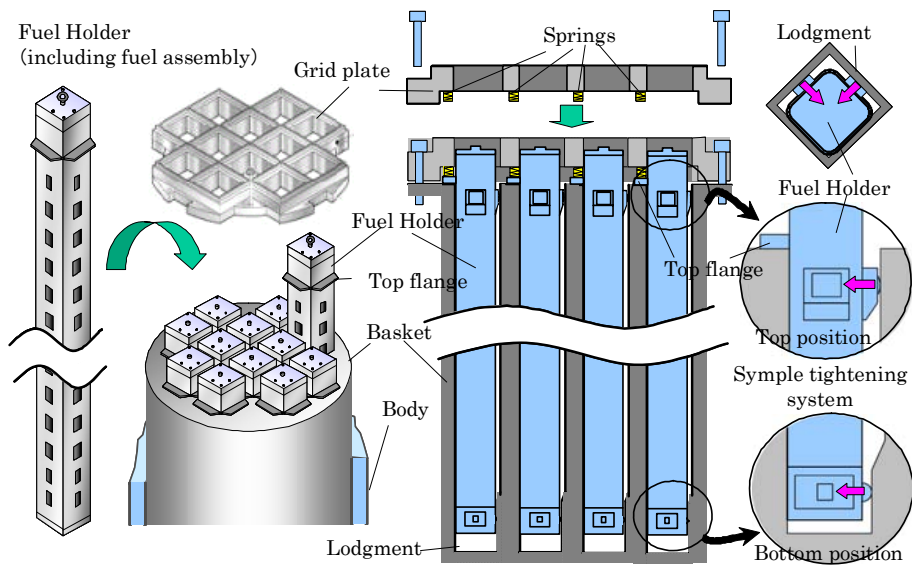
Fuel holder locking method of the J-MOX(B) cask
